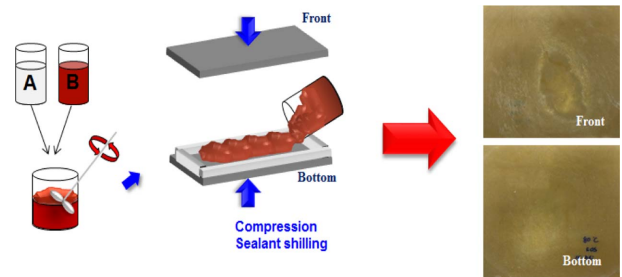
Schematic of manufacturing for p-DCPD (W) using compression molding
